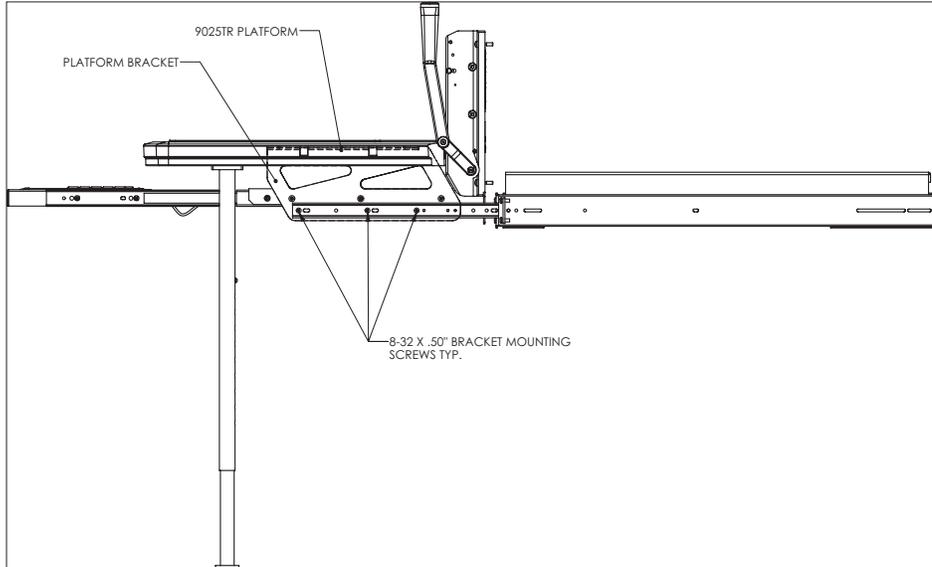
Figure C. The brackets will be securely reinstalled to the slides after the mounting screws are installed.
